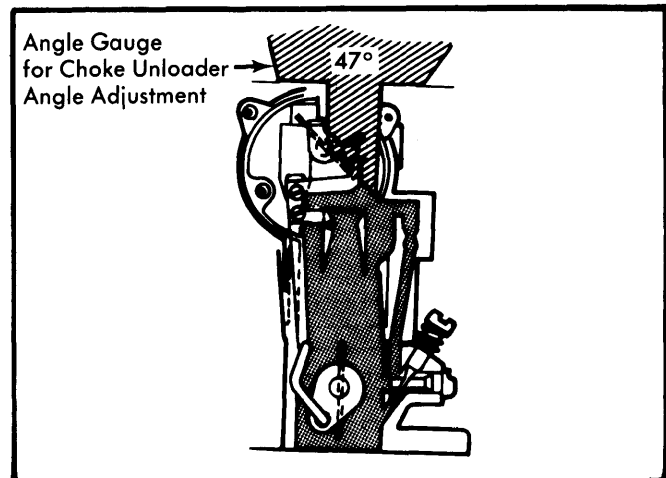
Adjusting Choke Unloader Angle with Gauge
